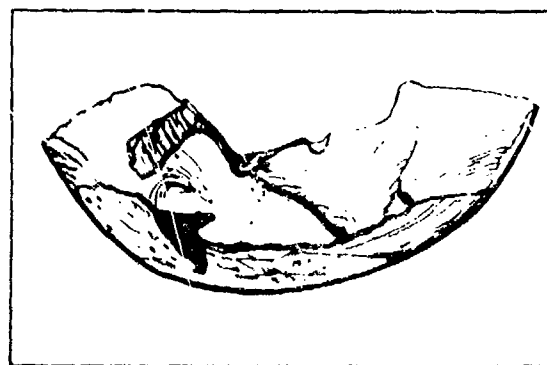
Enlarged view of fracture surface depicted in Fig. 15.3, indicating probability that failure originated in the fillet under the bolt head.
